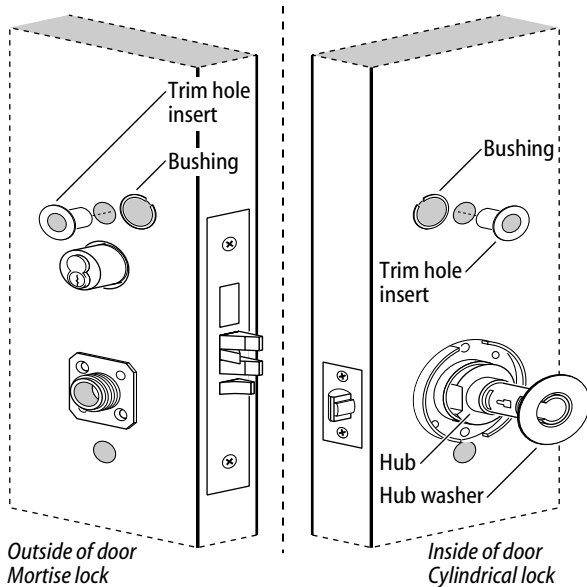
Installing the trim hole inserts, bushings, and hub washers (B.A.S.I.S. Lock shown)
